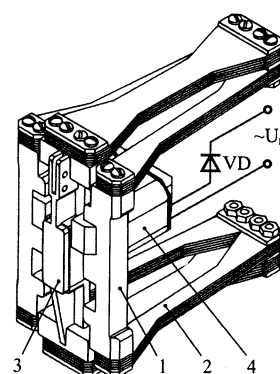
Oscillating electrical motor: 1 – stator, 2 – spring, 3 – the moving part, 4 – magnetic core with the winding
